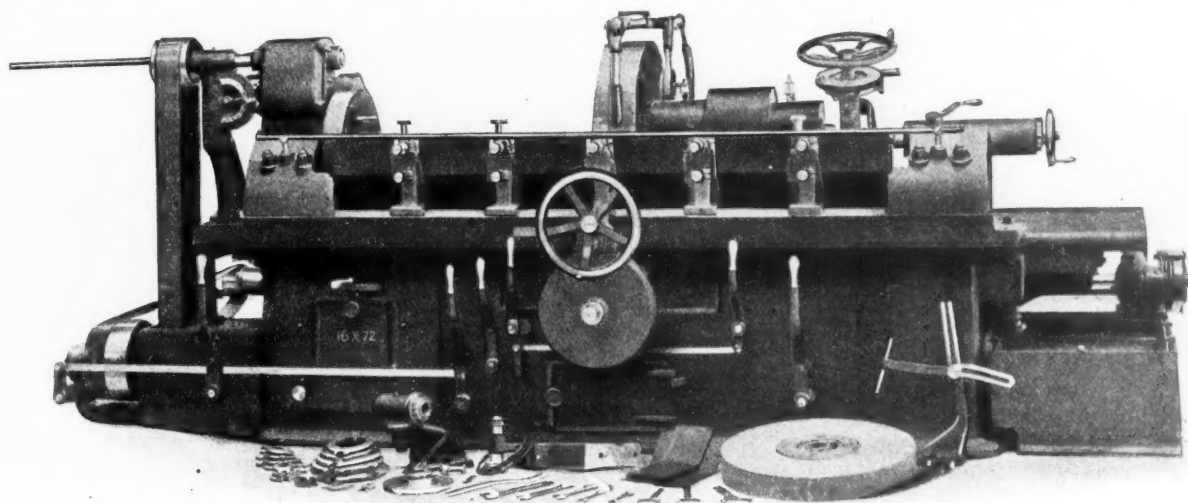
Landis 16 x 72-inch Plain Grinding Machine for Heavy Duty
